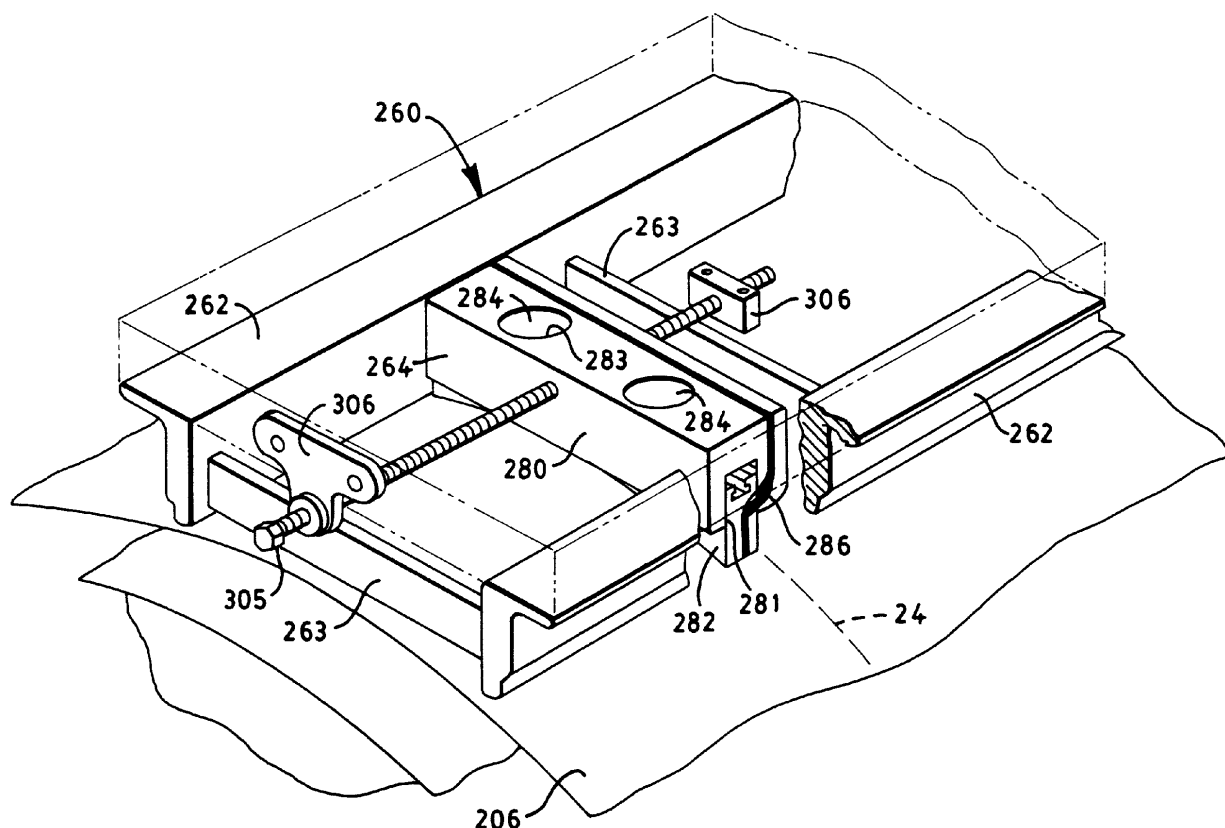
Air Plenum Sealing Assembly Positioned Against the Fabrics.
